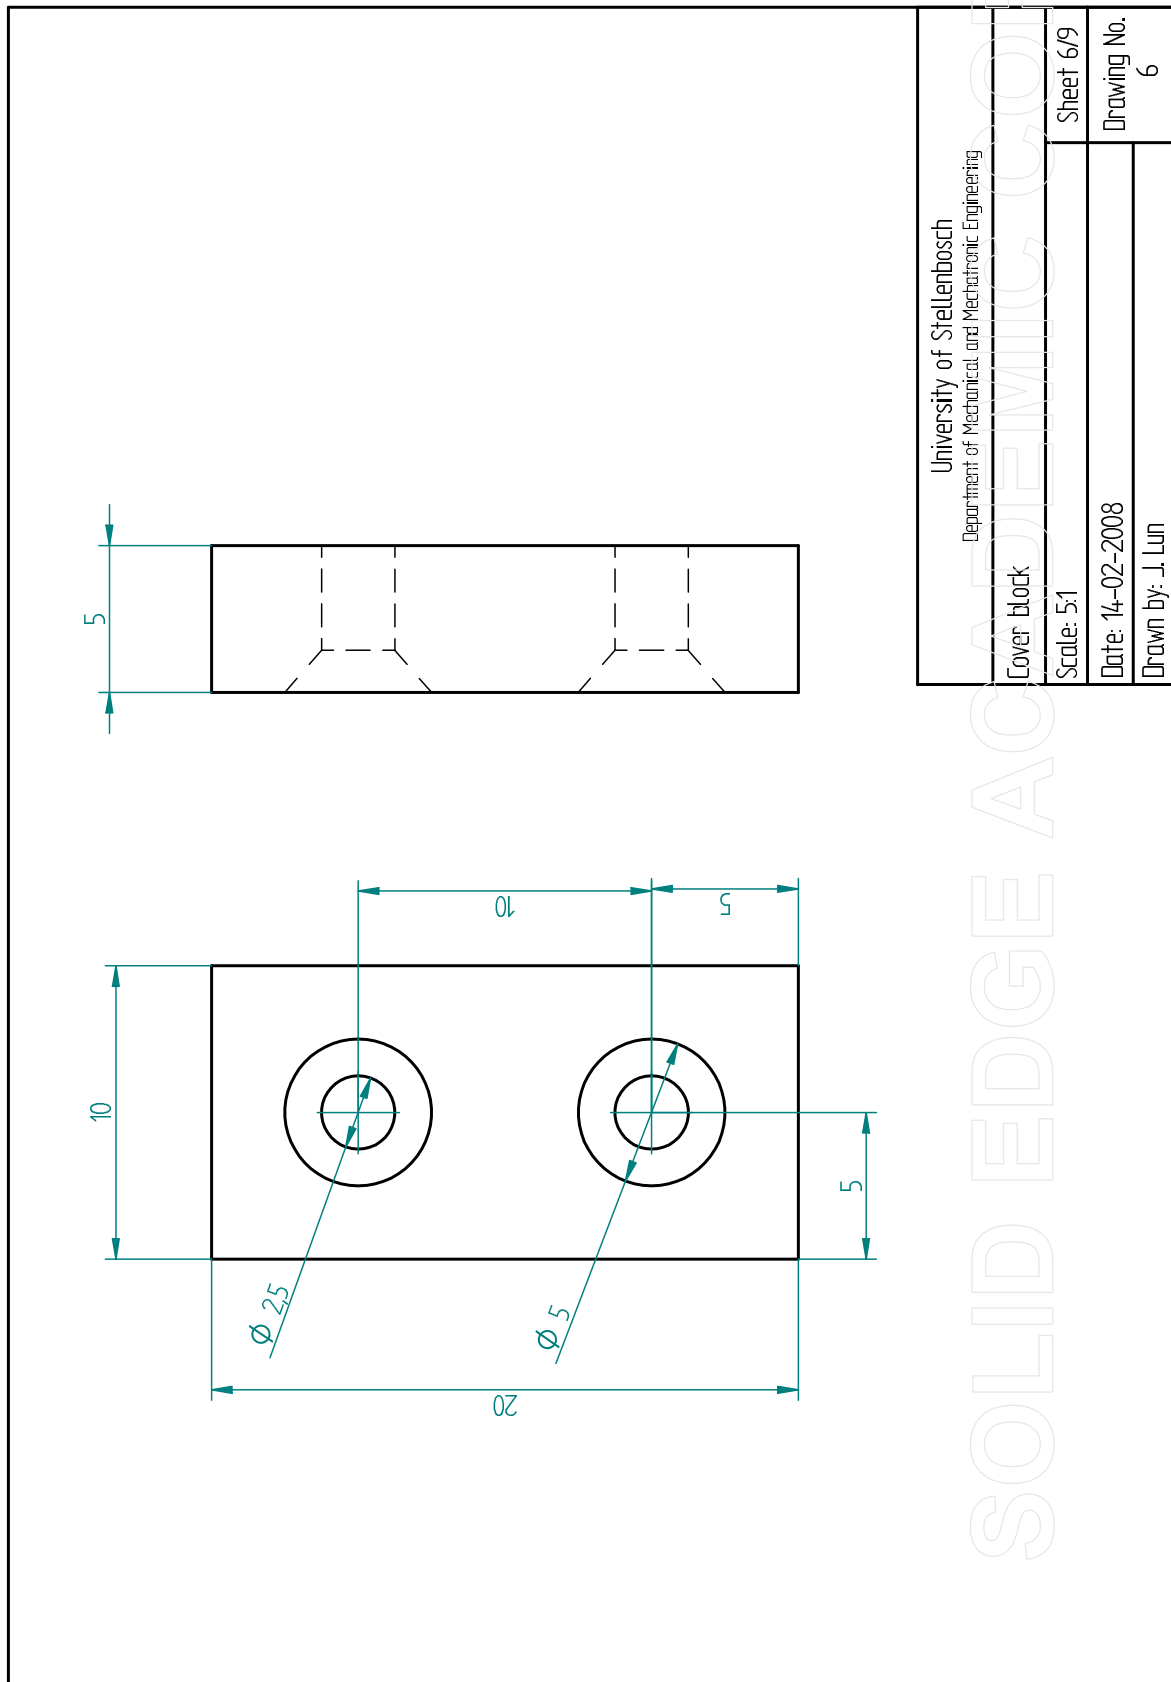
Design drawing of initial DTMS supporting cover blocks
